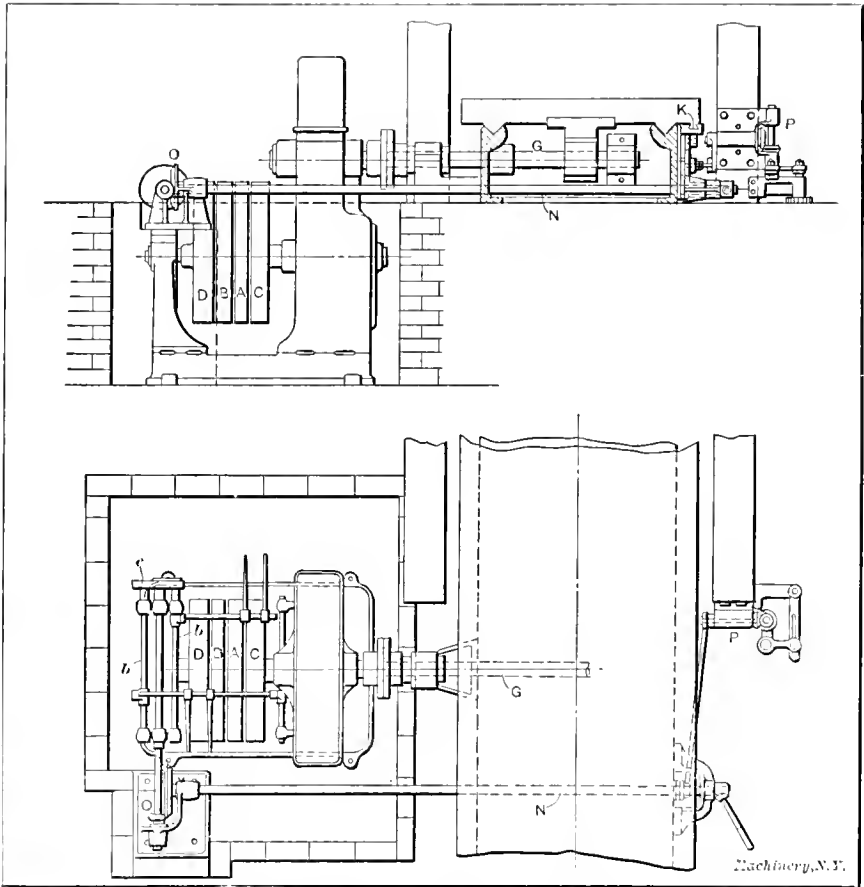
The Bateman Planer Drive applied to a 4-foot, 6-inch Planer
